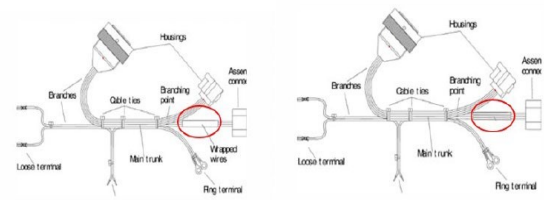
Wire harness diagram OK and NG defect no component
